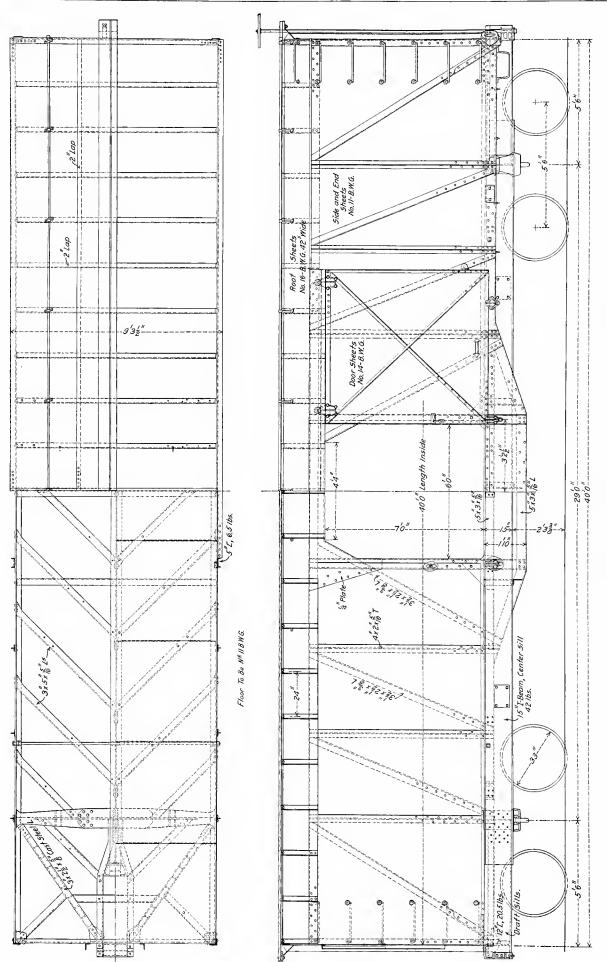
Side Elevation and Plan of Union Pacific All-Steel 50-Ton Capacity Box Car Shown in Figs. 1 and 262.
